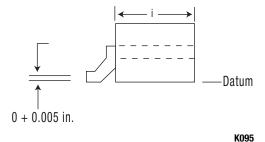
Surface Mount Tolerance for Components with Tabs
